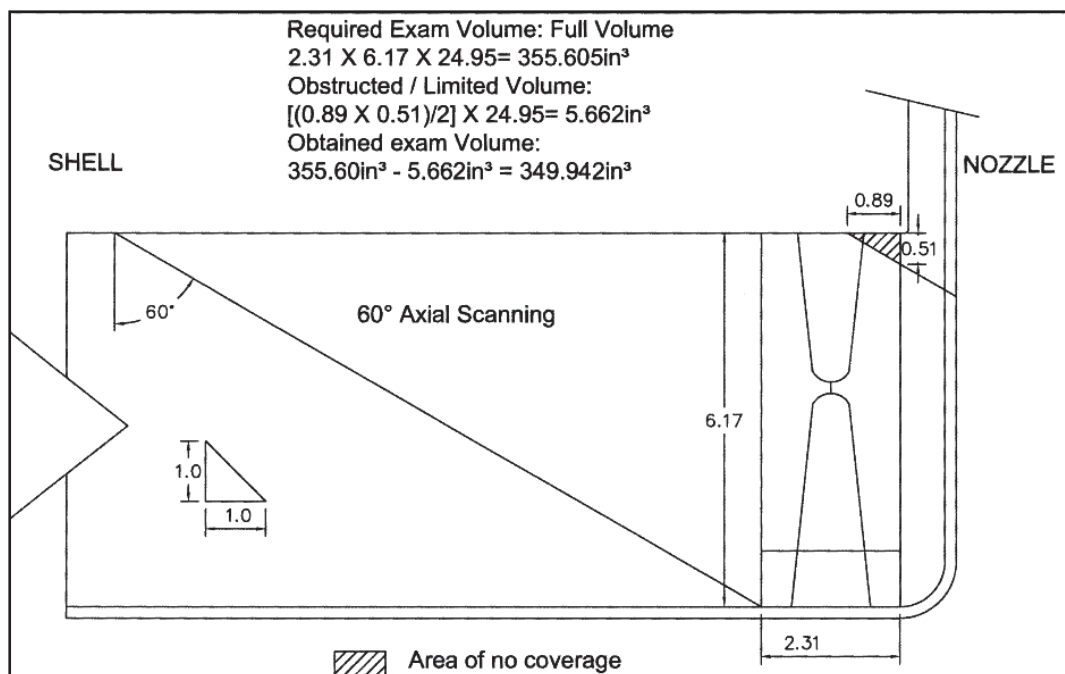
Weld N8A-NV, Achievable Radial Coverage
